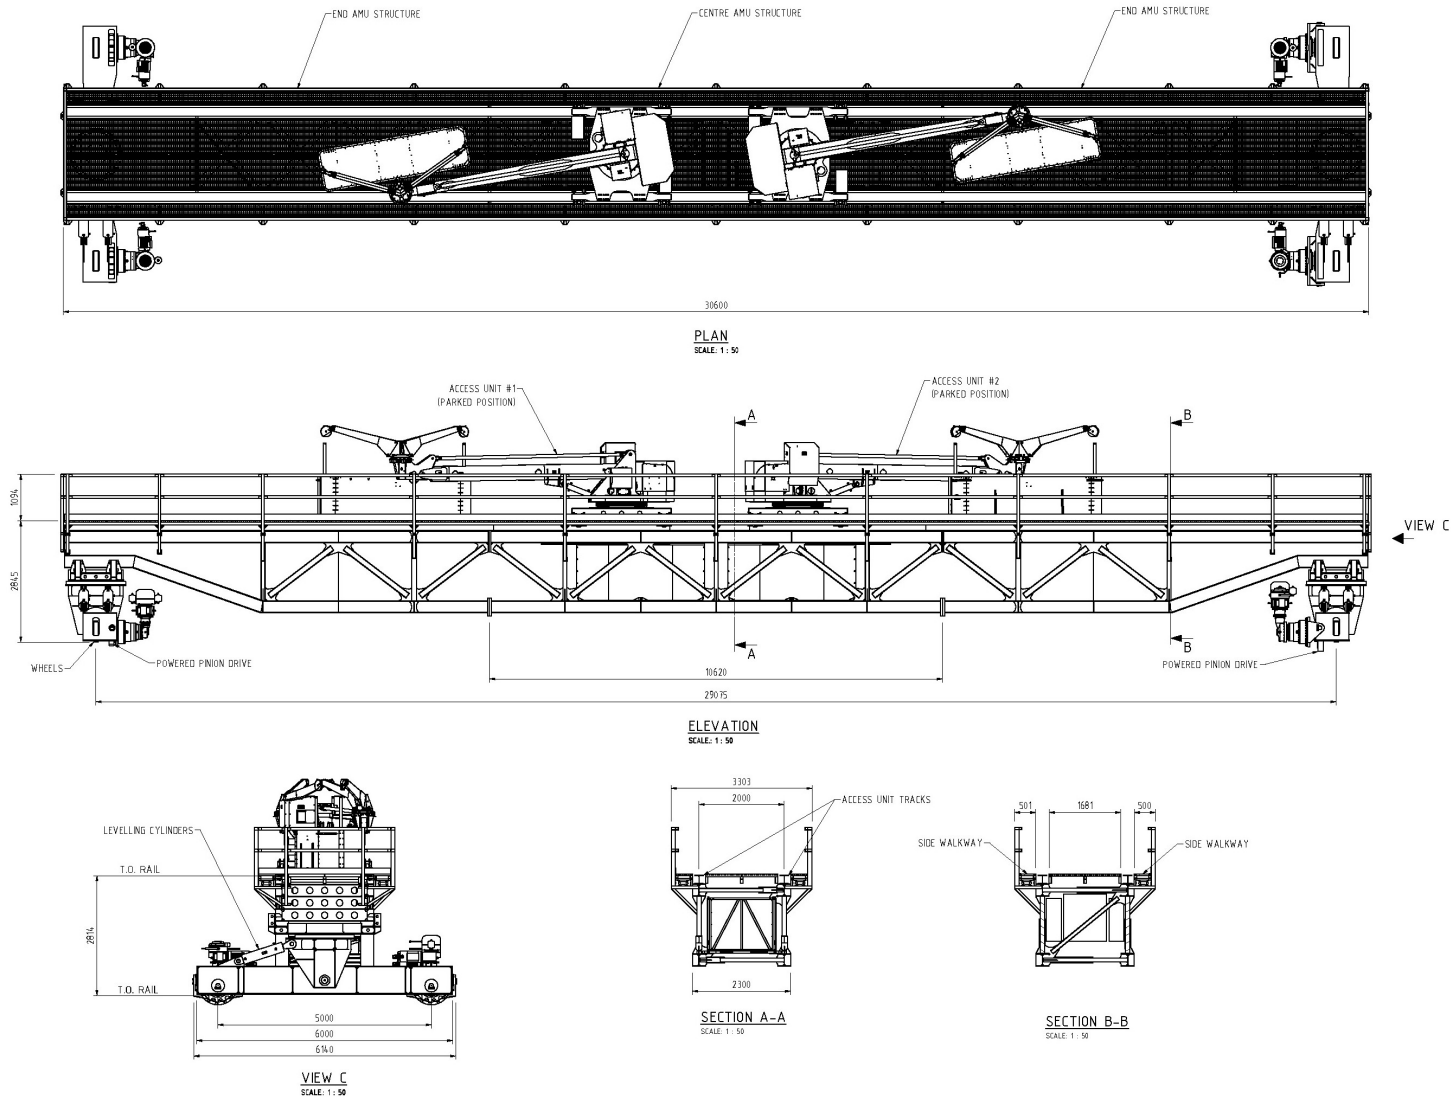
Plans, elevation, sections - proposed AMUs (Source: Mannetch)
